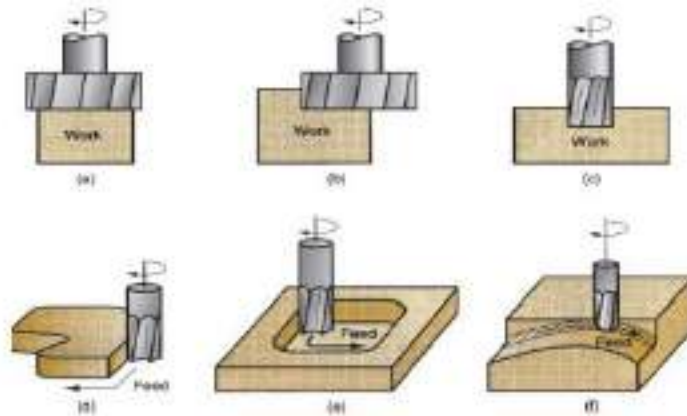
Face milling : a) conventional face milling, b) partial face milling, c) end milling, d) profile milling, e) pocket milling, f) surface contouring.
